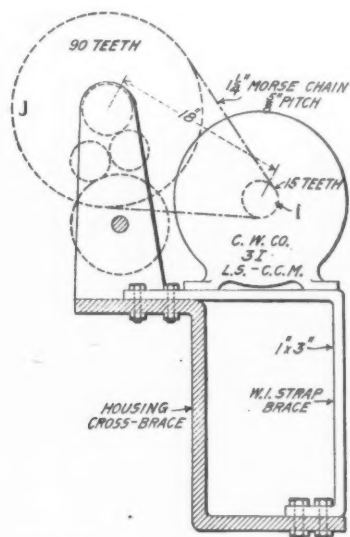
ARRANGEMENT OF THE INDIVIDUAL MOTOR DRIVE FOR OPERATING THE CROSS RAIL, RAISING AND LOWERING MECHANISM.
